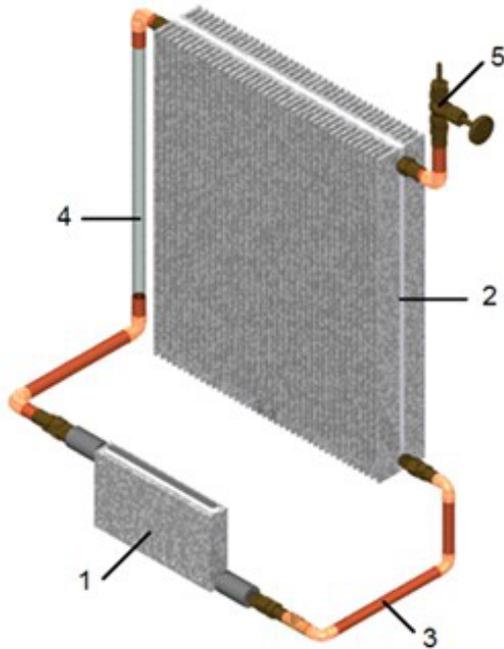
Model of loop thermosiphon 1 – evaporator, 2 – condenser, 3 – vapour pipeline, 4 – liquid pipeline, 5 – filling and closing valve.
